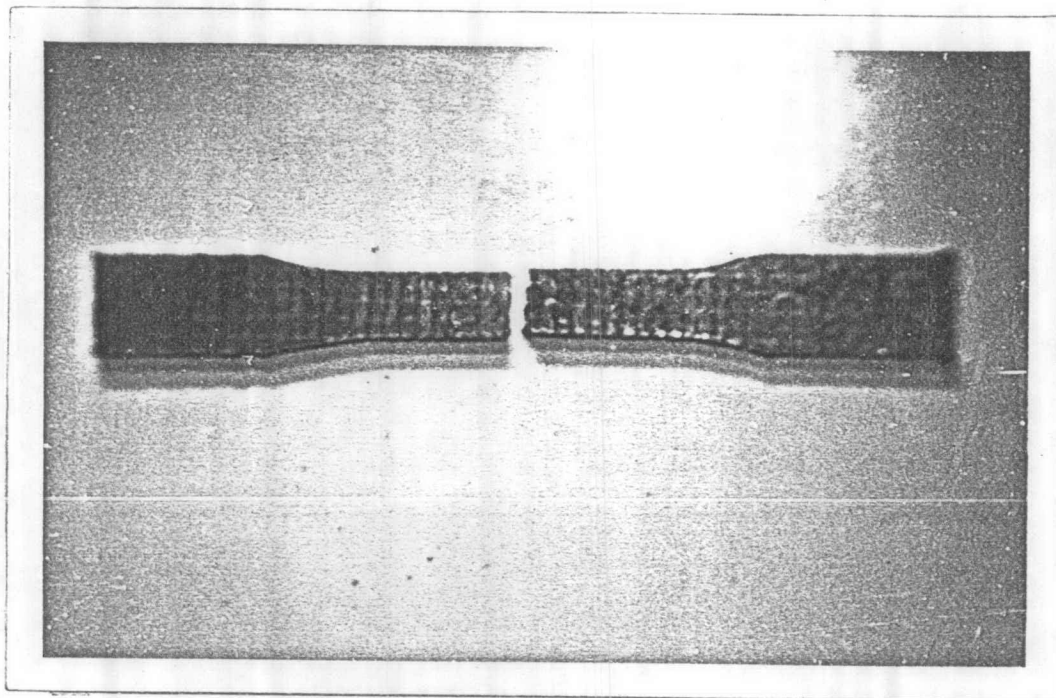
TEST SPECIMEN FOR JRP AFTER TENSILE TEST
